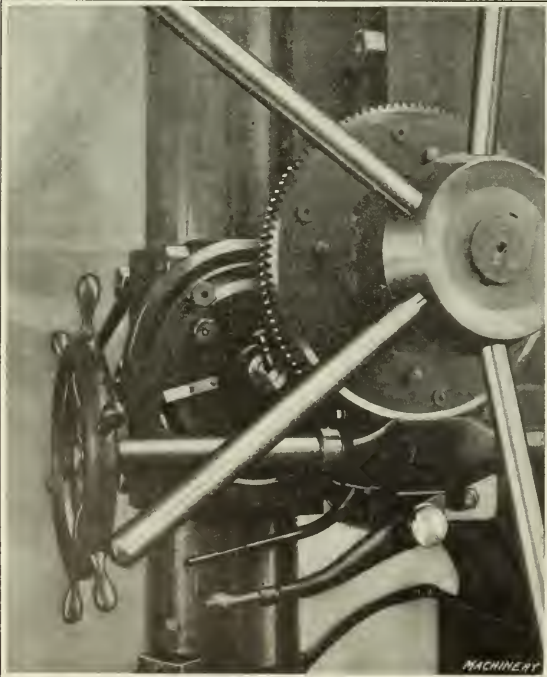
Close View of Feed Trip Mechanism in Place on Machine
